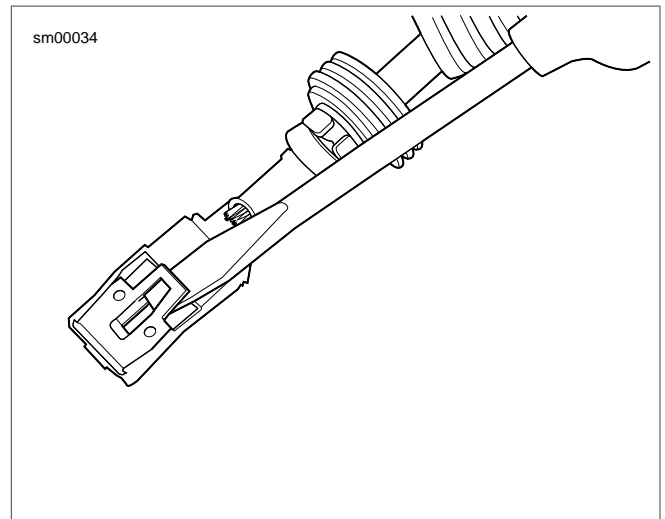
Delphi Main Fuse Housing: Bend Tang
